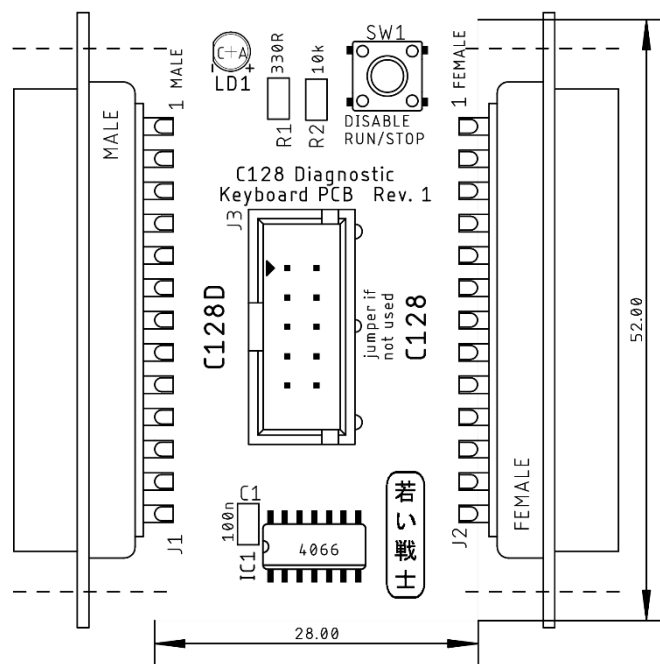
Dimensions of the C128 Diagnostic Keyboard PCB
